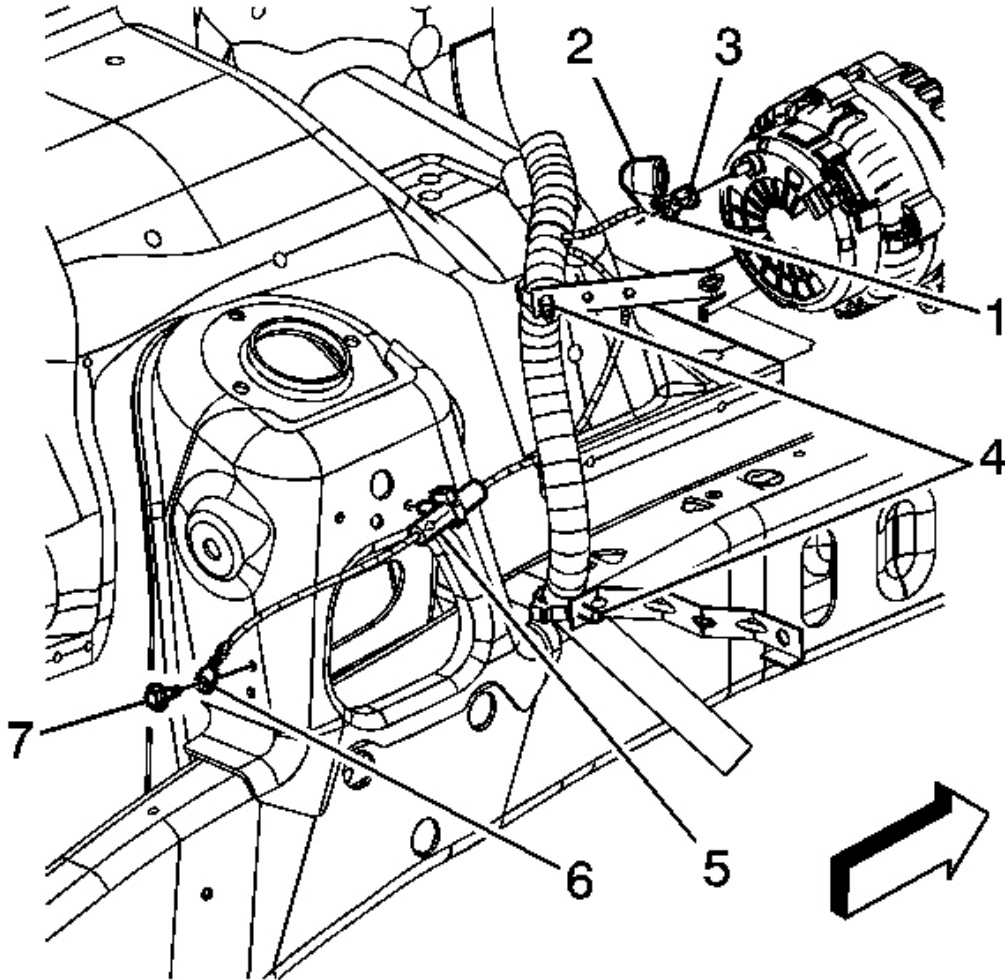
View Of Negative Battery Cable Ground Terminal Bolt At Shock Tower
